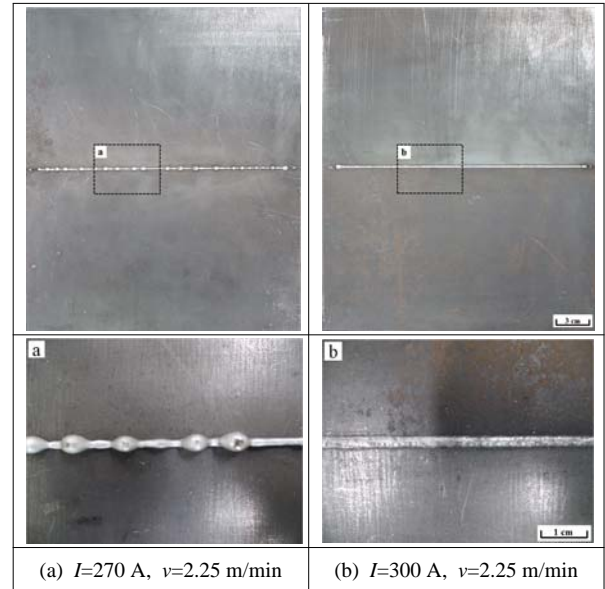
Back bead appearance of tensile specimen with welding current
